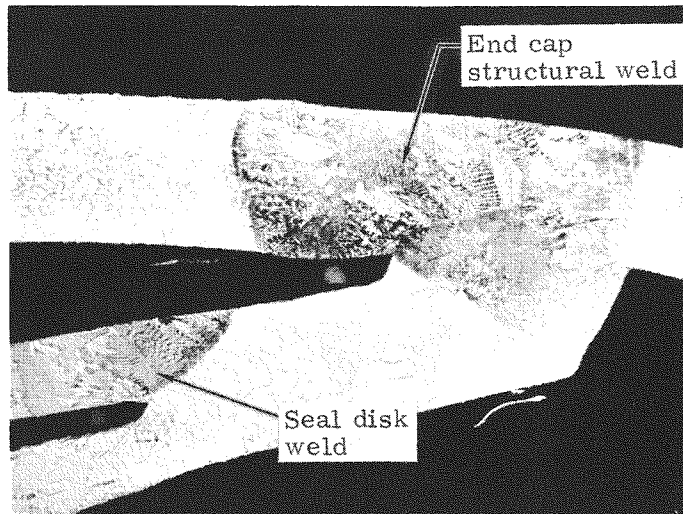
TYPICAL METALLOGRAPHIC SECTIONS THROUGH WELD ZONE OF CAPSULE FUELING PORT (16X MAGN)
